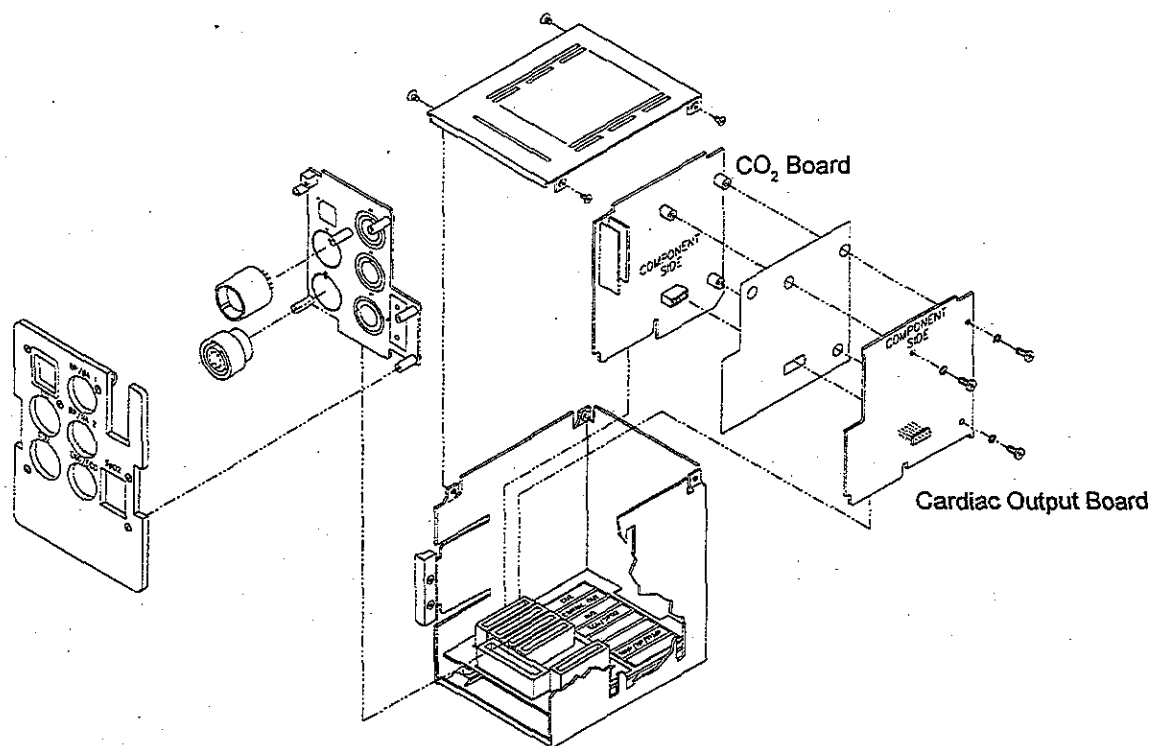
CO₂ with Cardiac Output Option - Exploded View
